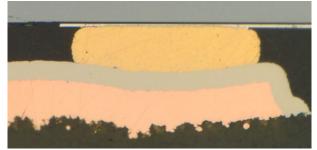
Thermocompression-bonded chip on board (crosssection, courtesy of AEMtec GmbH)
